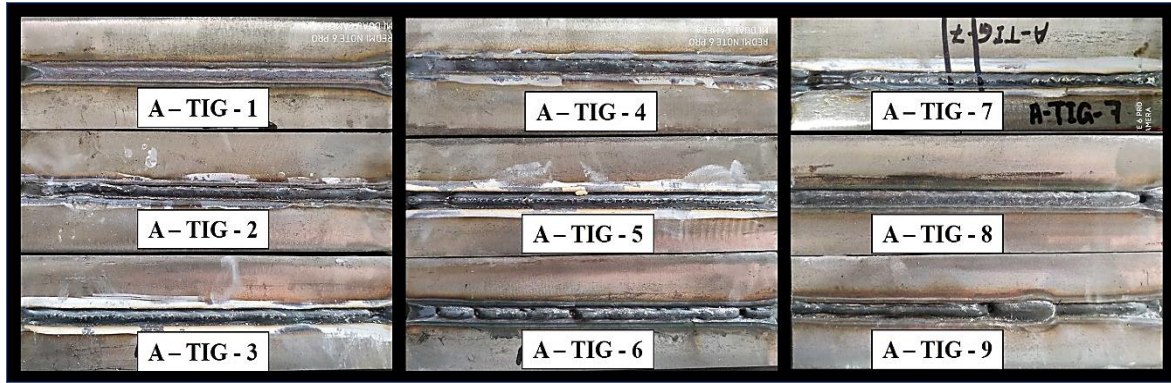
Weld-bead appearance of AA – TIG welding (1 To 9)
